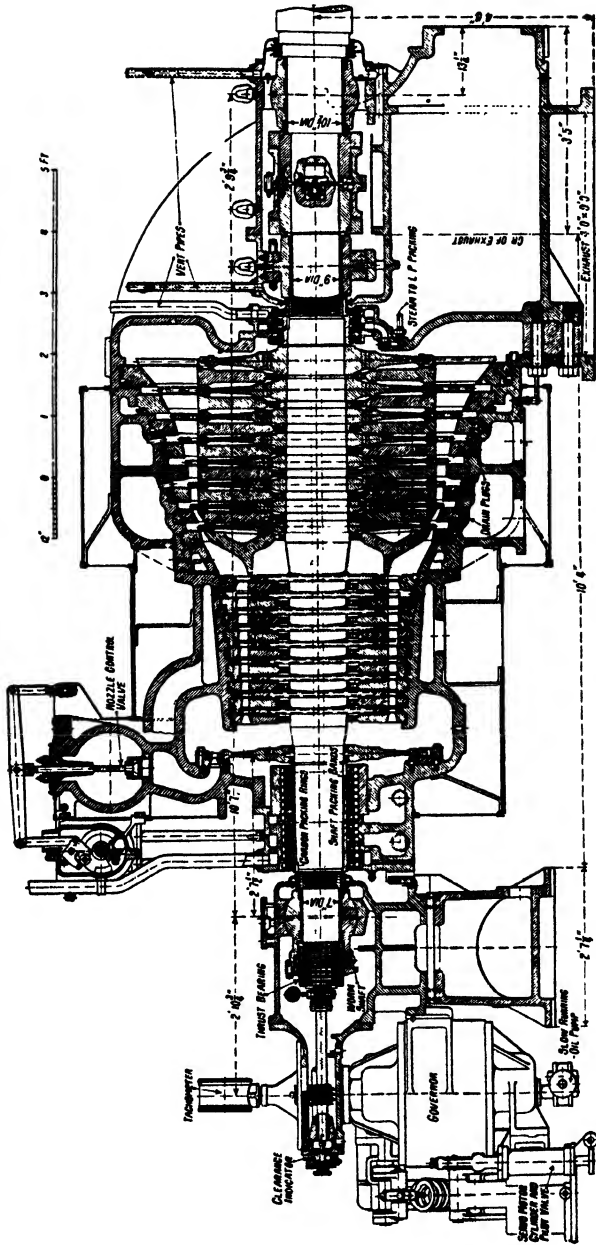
Longitudinal section of British Thomson-Houston turbine installed on S.S. *Viceroy of India*. The expansion is completed in one casing. (*The Marine Engineer & Motorship Builder*.)
